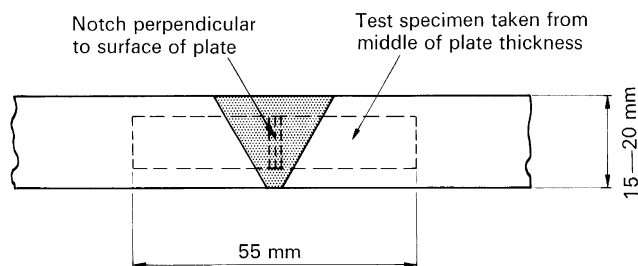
Butt weld test assembly position of impact test specimens
